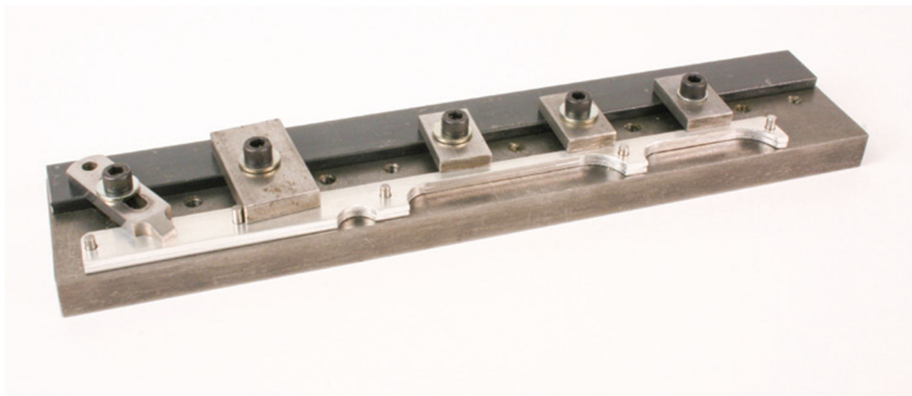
Fixture for holding material to make part of a security bracket.
